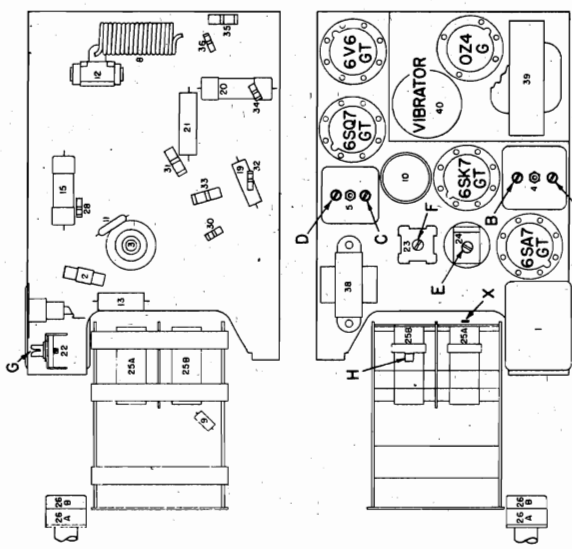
PARTS LOCATING DIAGRAM (TOP AND BOTTOM VIEWS)
